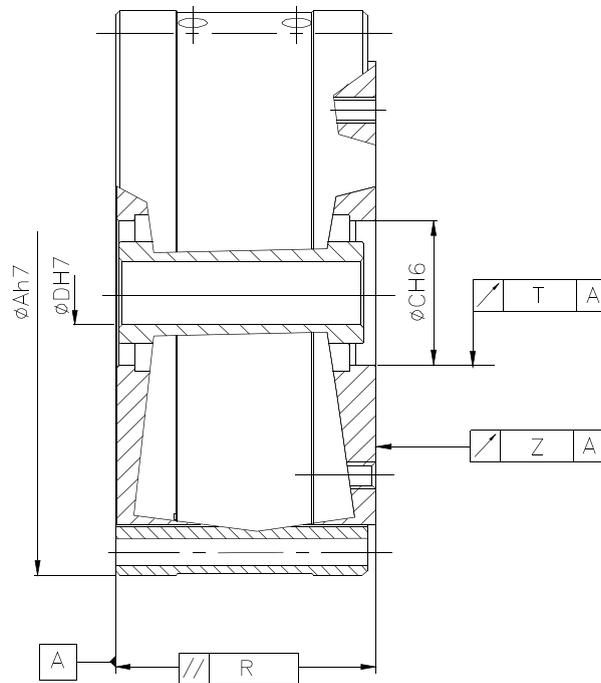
Circumferential and front run-out values of TwinSpin bearing reducers /
